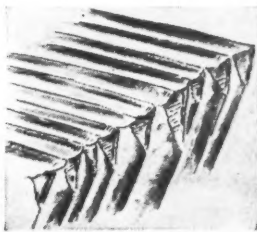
Note how the "peaks," unequal to the heavy load, break off, quickly dulling the cutting edge.
